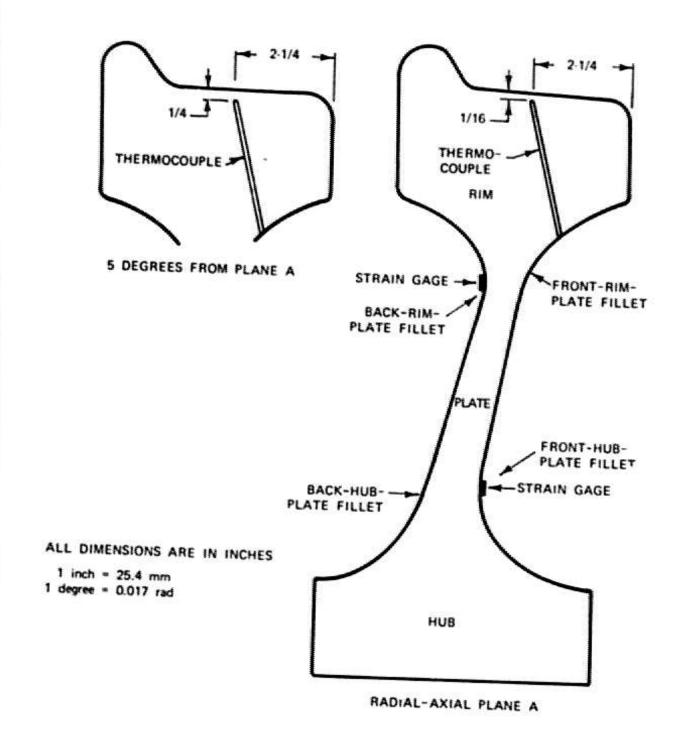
LOCATIONS OF THERMOCOUPLES AND STRAIN GAGES FOR DYNAMOMETER TESTS OF WHEEL NO. 2
